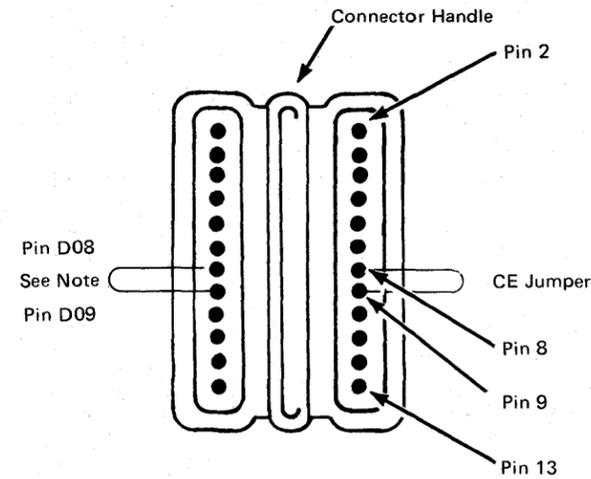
3278 Top-Card Connector CE Jumper (Two Base Cards)
